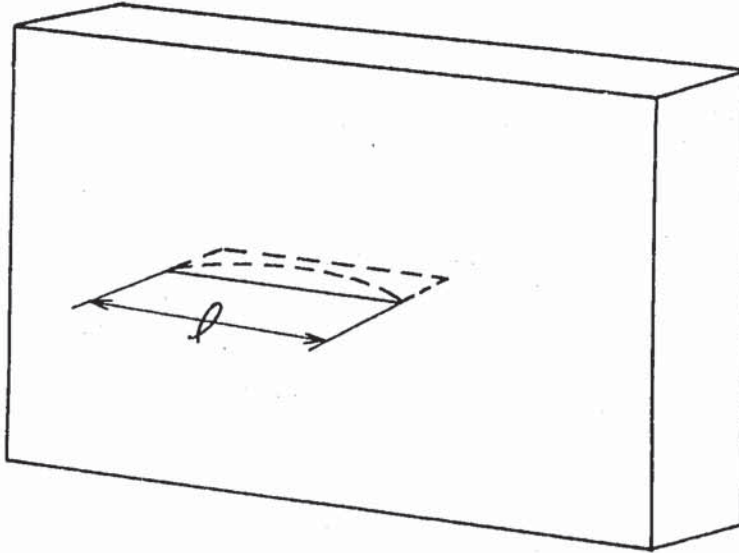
THROUGH WALL CRACK ASSUMPTION
